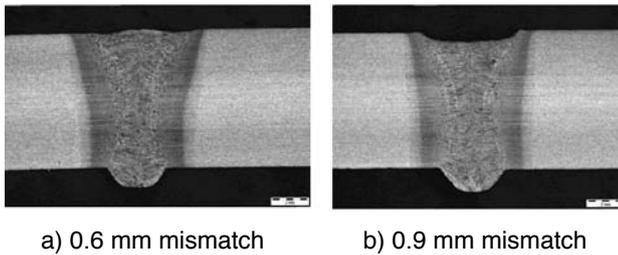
Cross-sections through adaptively controlled hybrid weld made over joint with gap of 0.6 mm a) and 0.9 mm b).
